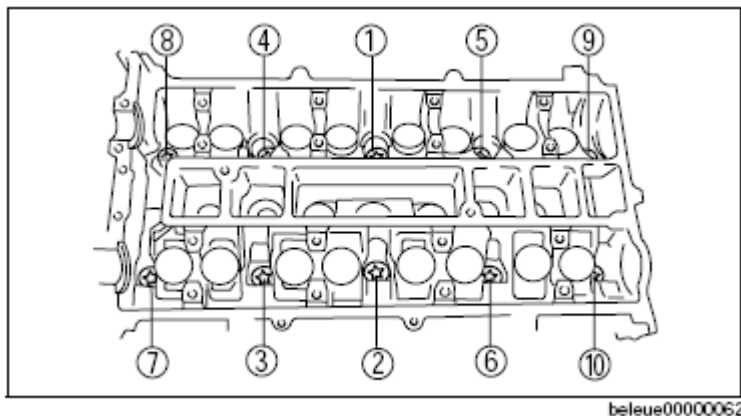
Identifying Cylinder Head Bolt Tightening Order
